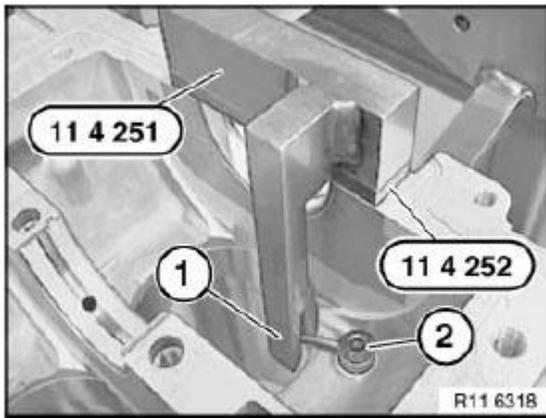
Checking Oil Spray Nozzle Position According To Position On Special Tool 11 4 251
